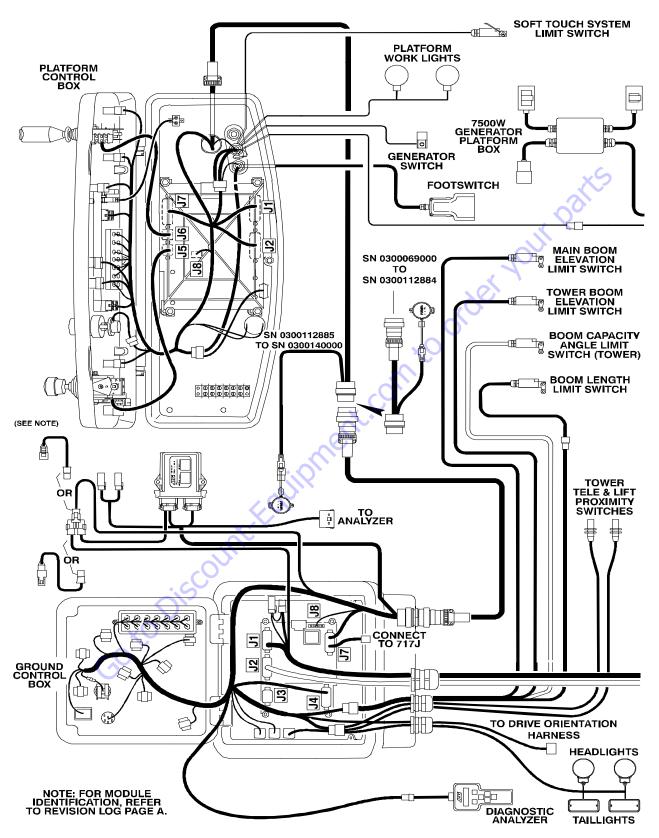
Electrical Components Installation w/ADE (S/N 0300069000 to S/N 0300140000) - Sheet 1 of 2
